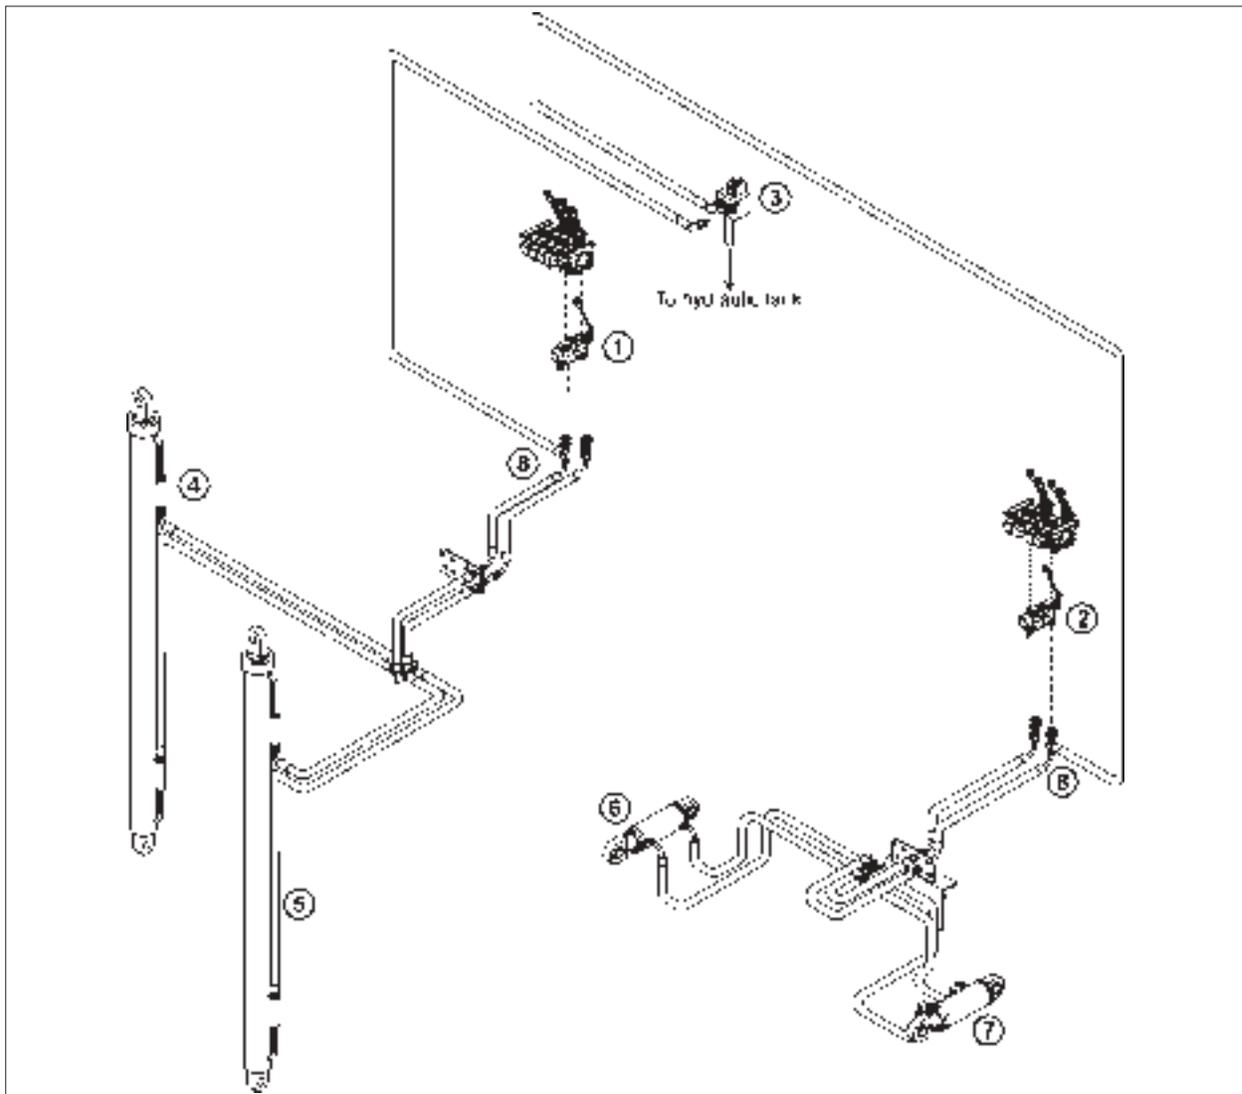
M5 / M40 LOWER AND GO HYDRAULIC SYSTEM COMPONENT LAYOUT
